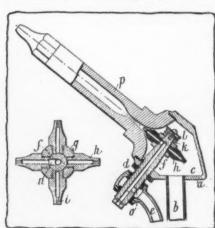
Burner with variable oxygen feed, for autogenous welding
